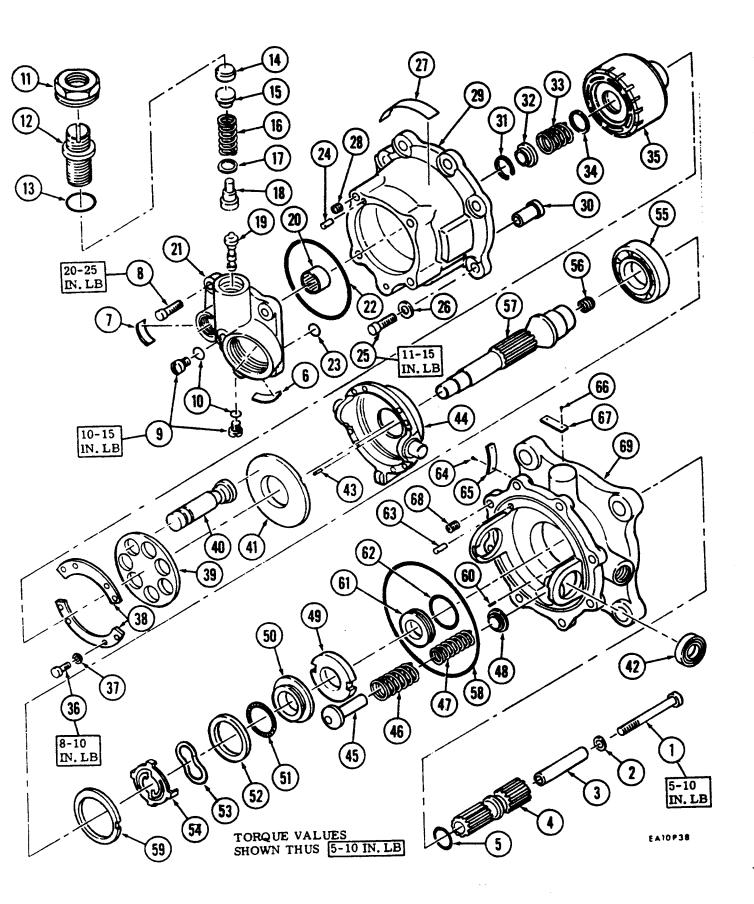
Variable Displacement Hydraulic Pump Assembly Exploded View (Sheet 1 of 2)
